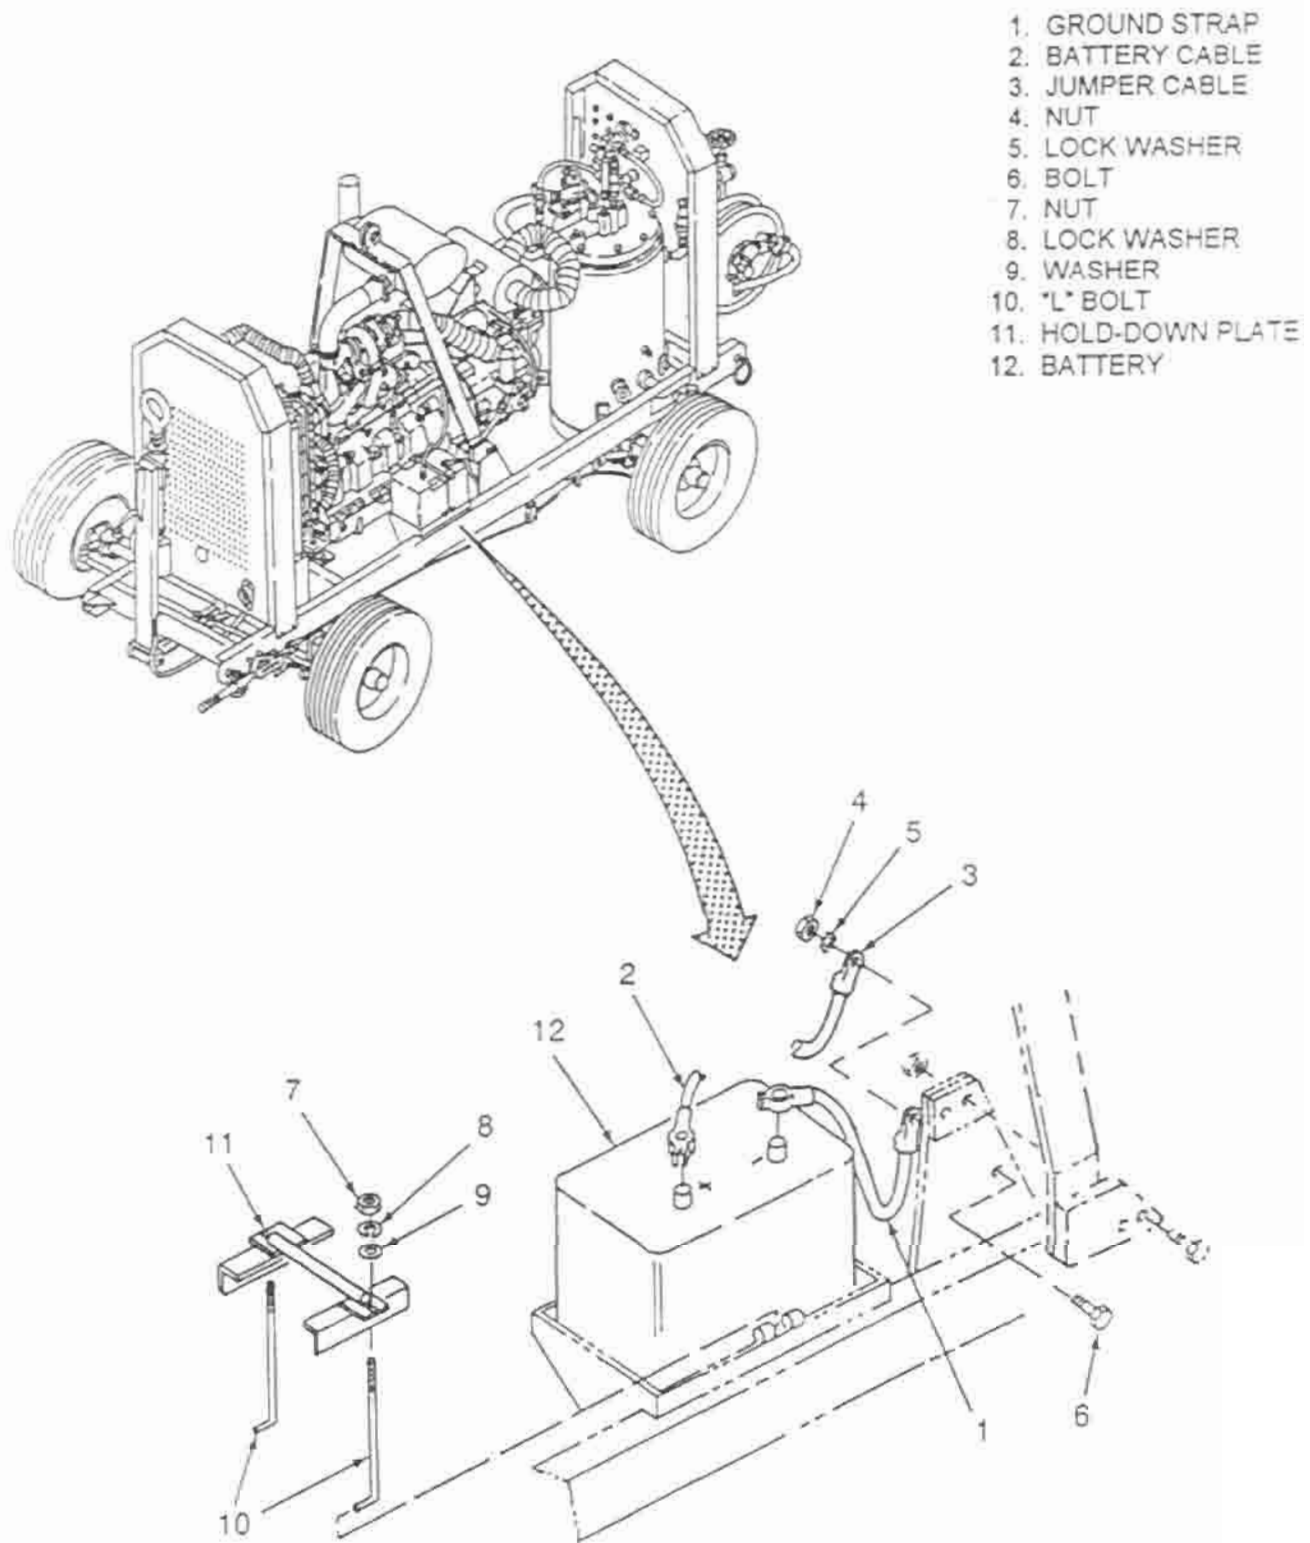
Battery Cable, Battery Mounting Disassembly
